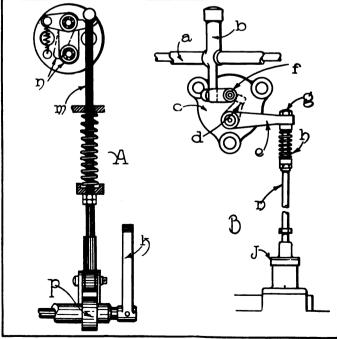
Forms of Igniter or Make and Break Systems: A, Bosch Low-Tension; B, Igniter Mechanism Formerly Em-ployed on Well Known Makes of Pleasure Car.
